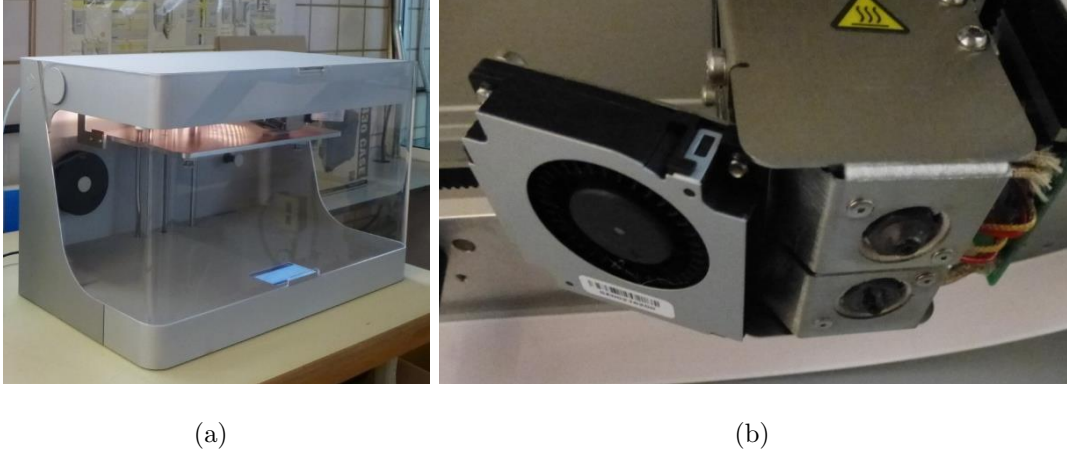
(a) General view of the 3D printer. (b) Detail view of the two printer injectors.
